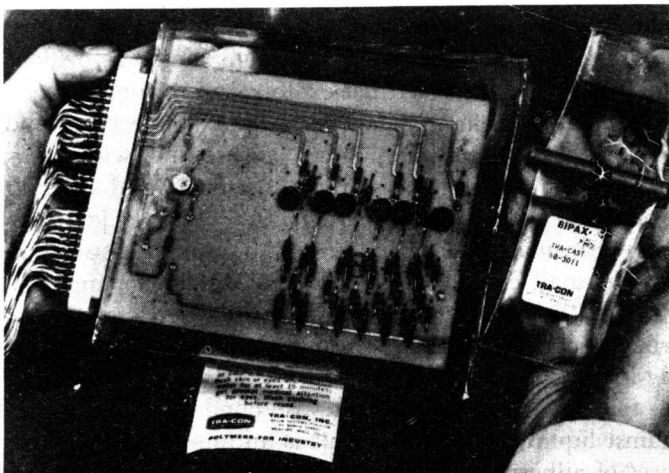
A circuit board cast with a clear epoxy coating. (*Tra-con Adhesives.*)
